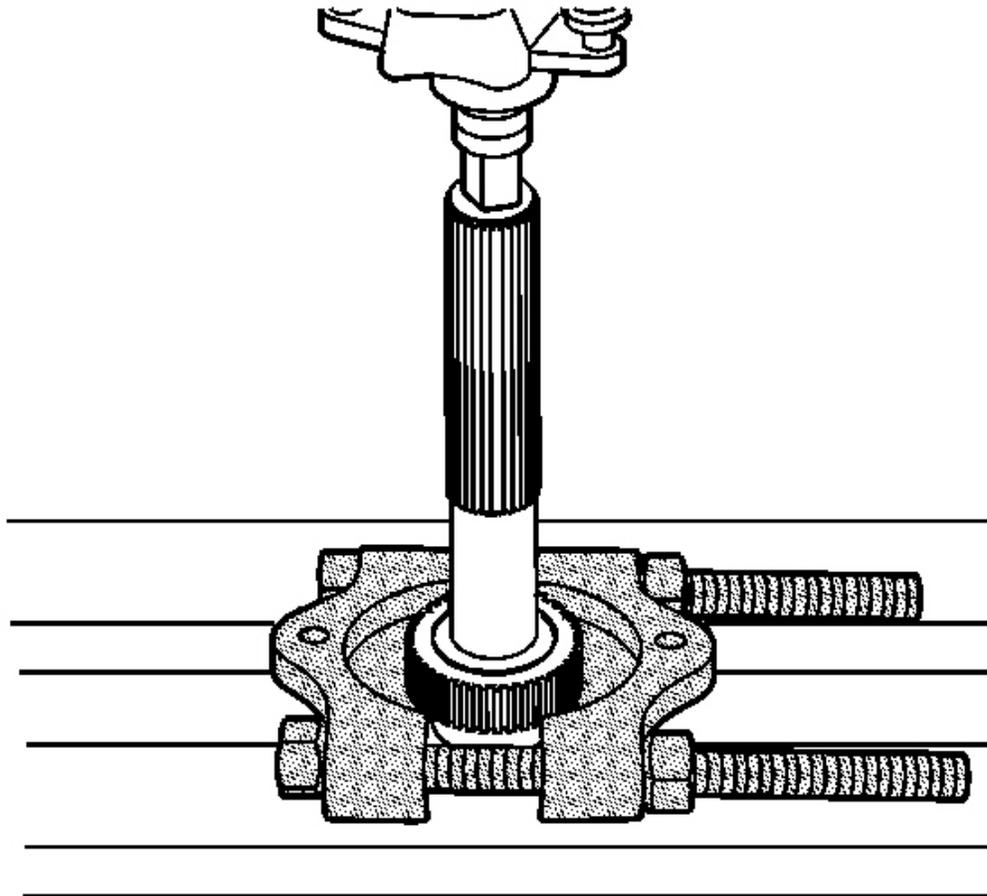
Removing Speed Reluctor Wheel With J 22912-01
